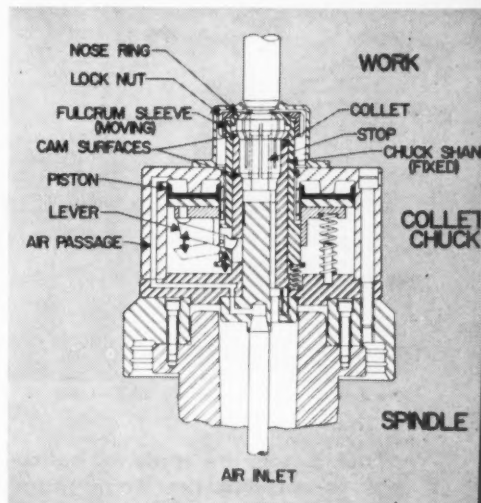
Cross-sectional drawing of Erickson collet chuck which is designed to assure concentricity within 0.0005 inch TIR (total indicator reading) at the nose of collet.
